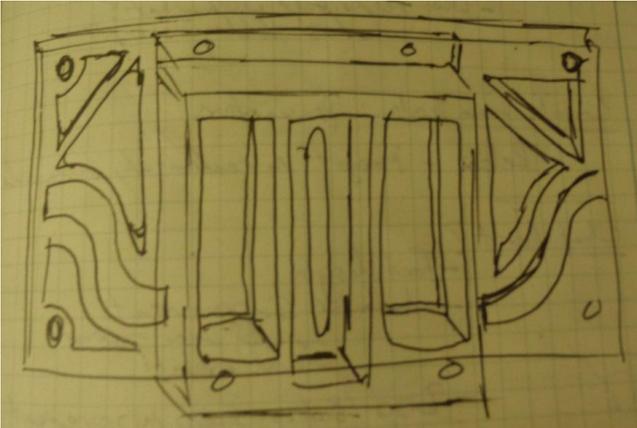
Weight Reduction Concept Generation. Note that most of the aluminum removed reflects the inner workings of the spring assembly.
